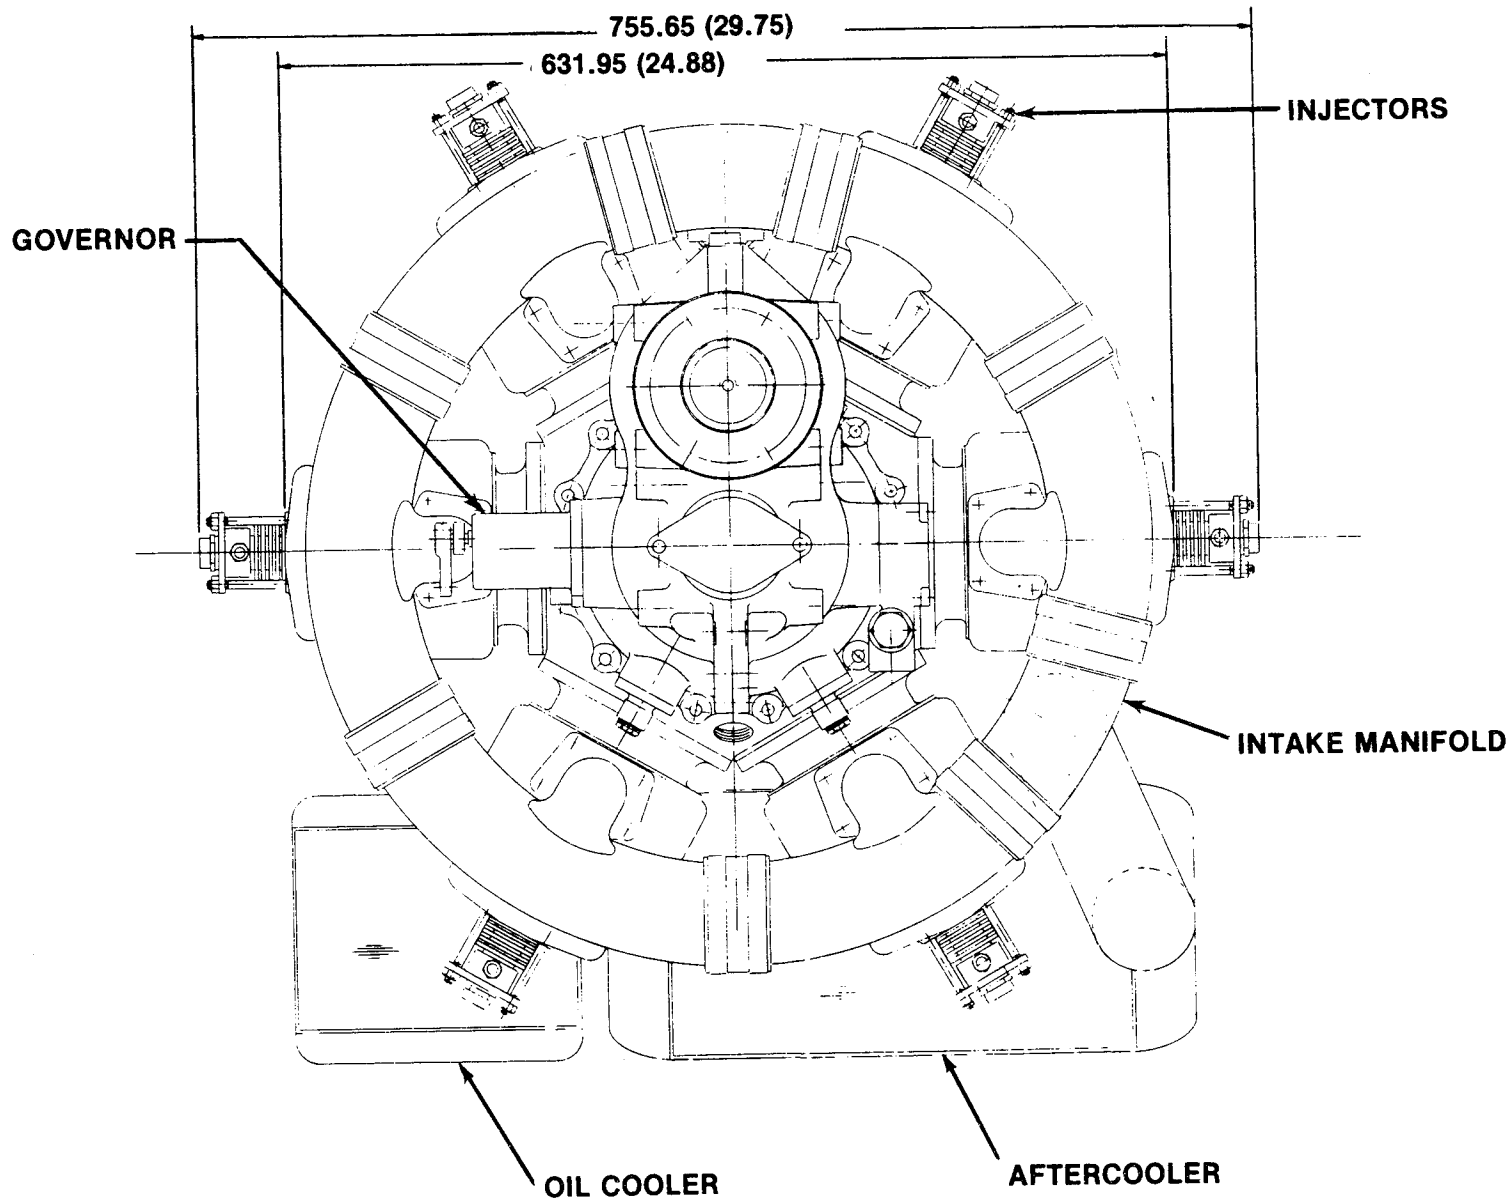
298 kW AIRCRAFT DIESEL—FRONT VIEW
